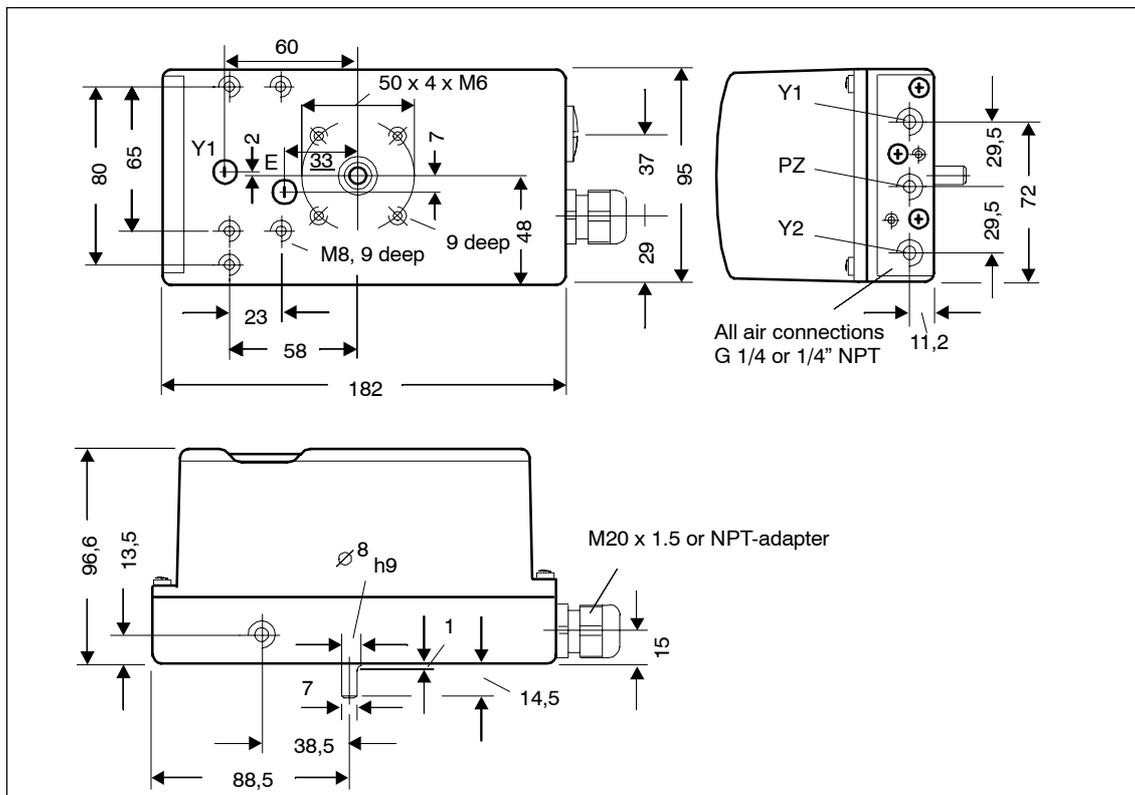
Dimensional drawing version plastic housing 6DR5xx0
